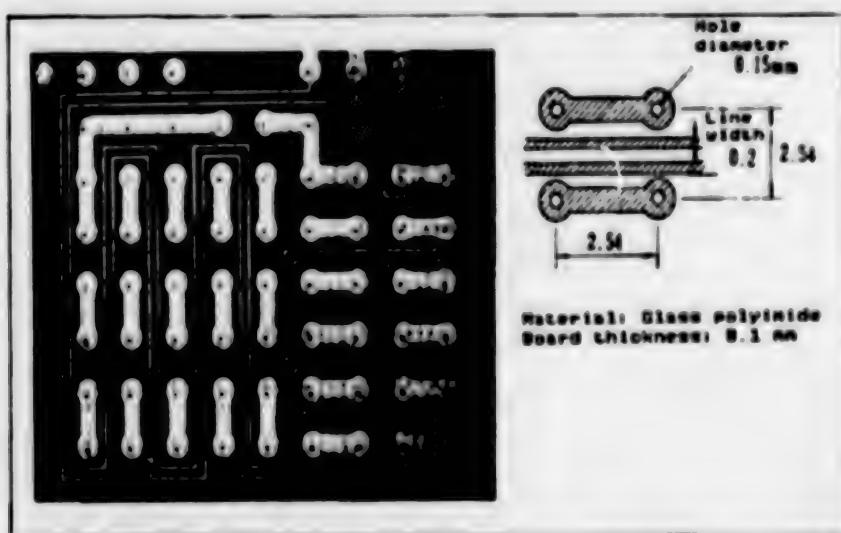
Through-Holes Drilled in PC Board Using Electron Beam
